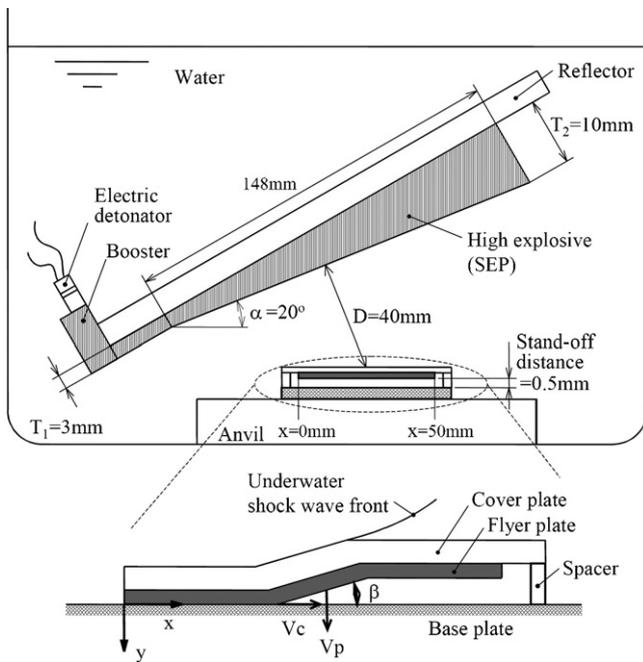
Experimental setup employed for underwater explosive welding.
